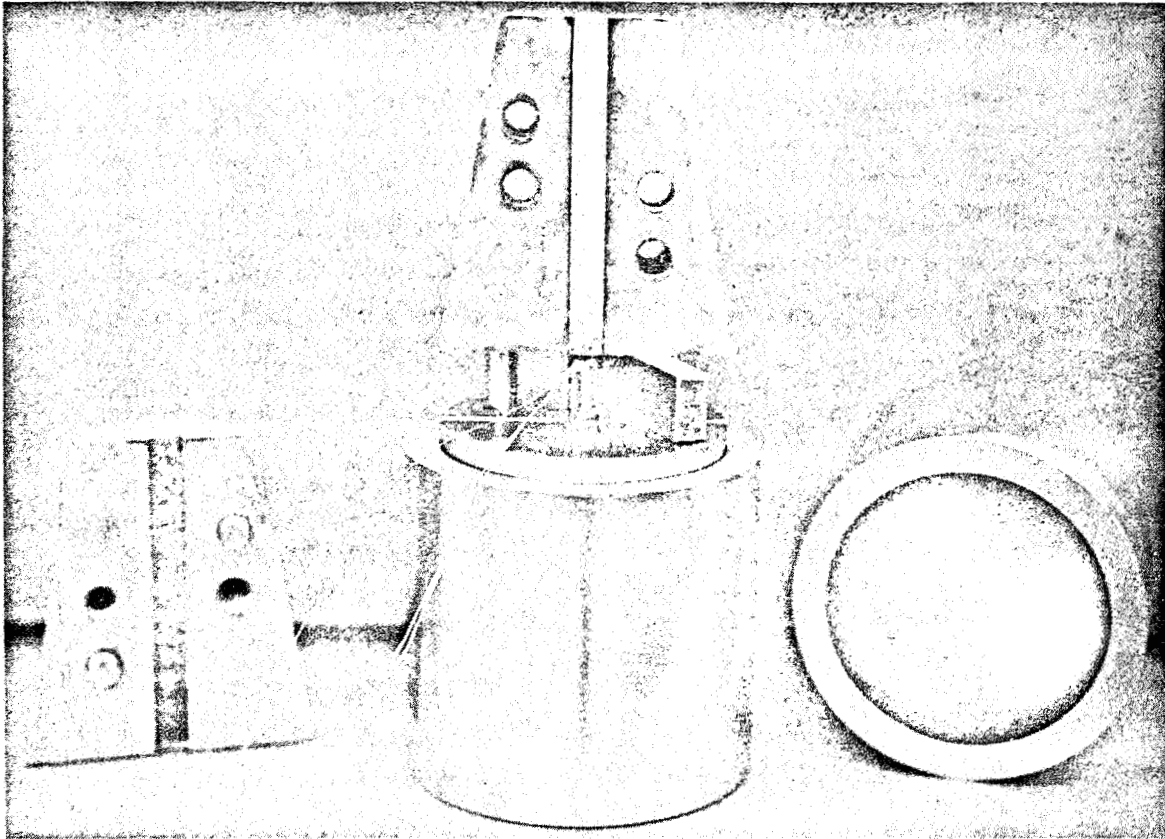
CELANESE COMPRESSION TEST FIXTURE
